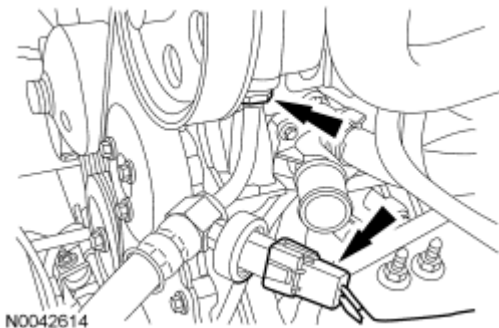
Locating Fuel Supply Tube Spring Lock Coupling
